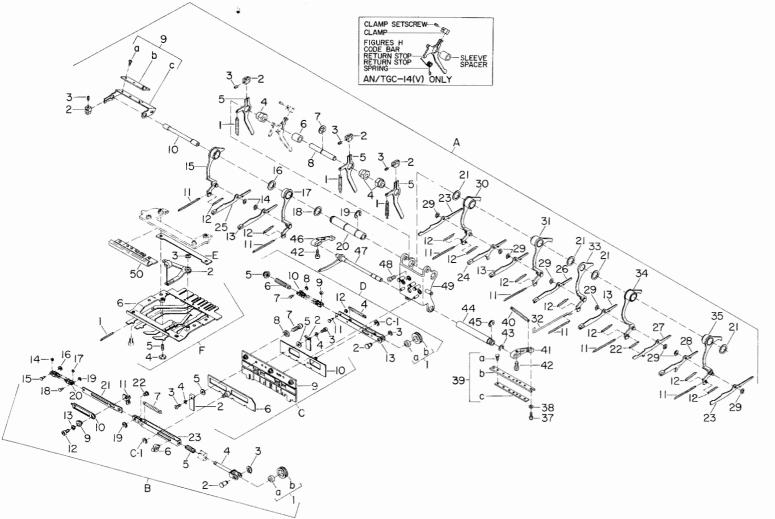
Advance Drum and Linkage Assembly SL-4-03315 Figure 16
